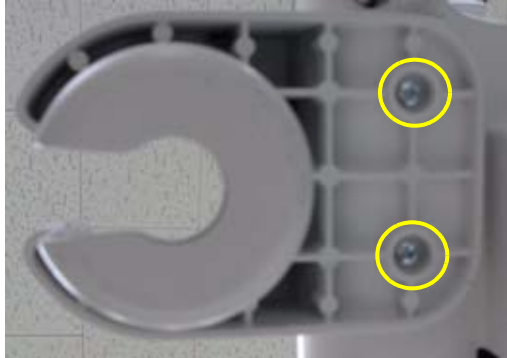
Assemble TV PROBE HOLDER BASE with 2 screws (2159634, BH M4x10)
